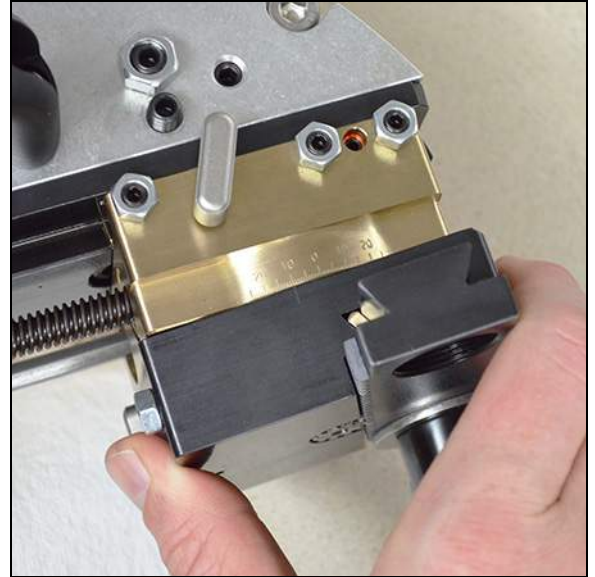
SWIVEL THE TOOL HEAD (FF1200 SHOWN)
